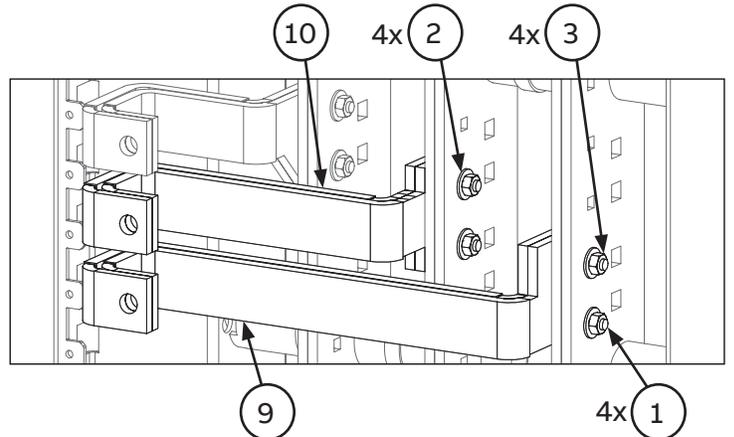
Installation of link assy. (middle & right); right side cable entry
